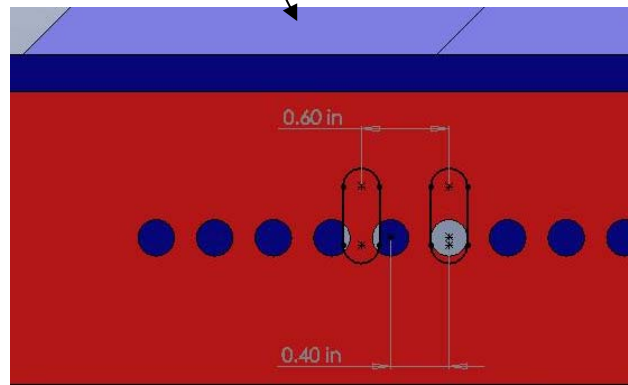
Groove and hole allows vertical flush fit and utilizes the concept from the Vernier caliper with the smallest increment for hole and groove alignment of .2".
